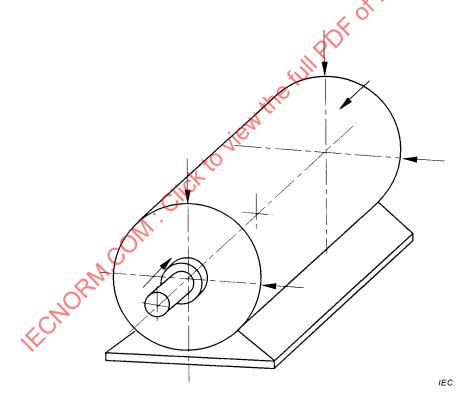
Measurement positions for those ends of machines where measurements according to Figure 2 are not possible without disassembly of parts
